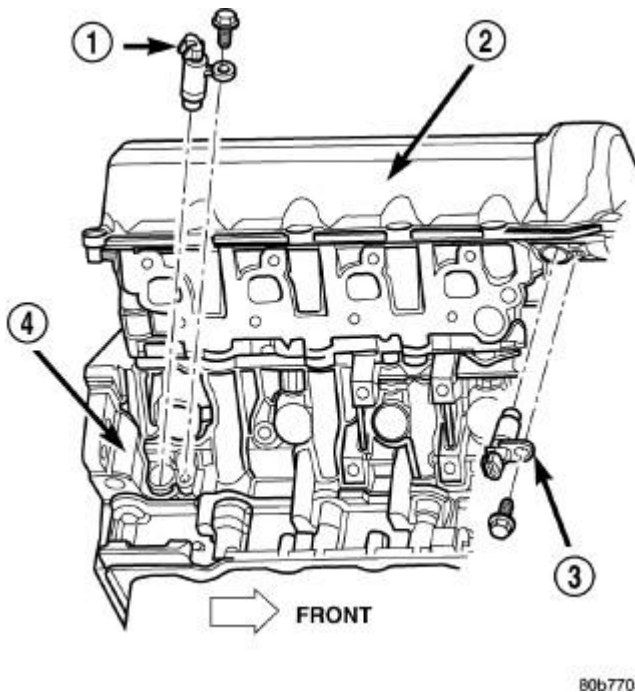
Crankshaft Position Sensor, Camshaft Position Sensor, Engine Cover & Bolts
